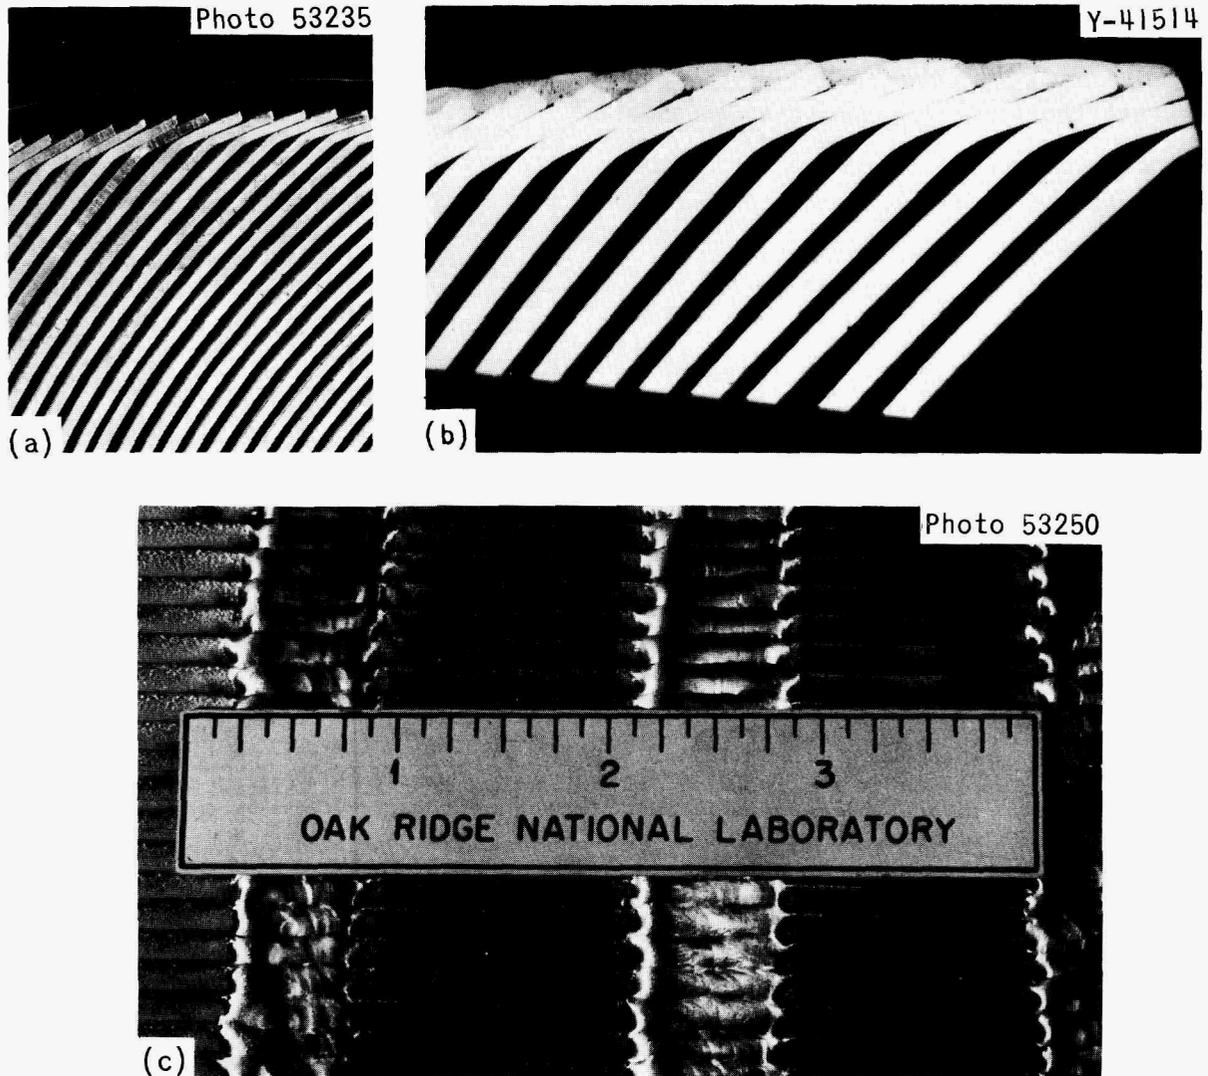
Typical Weldments Joining the Fuel Plates. (a) Joints before welding. (b) Transverse section through welds. (c) As-welded surface, showing circumferential welds.
